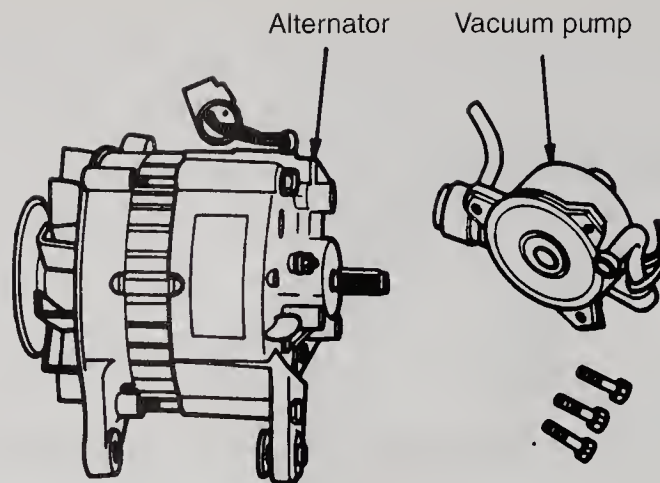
This auxiliary vacuum pump is mounted on the rear of the alternator and driven by the alternator shaft.
